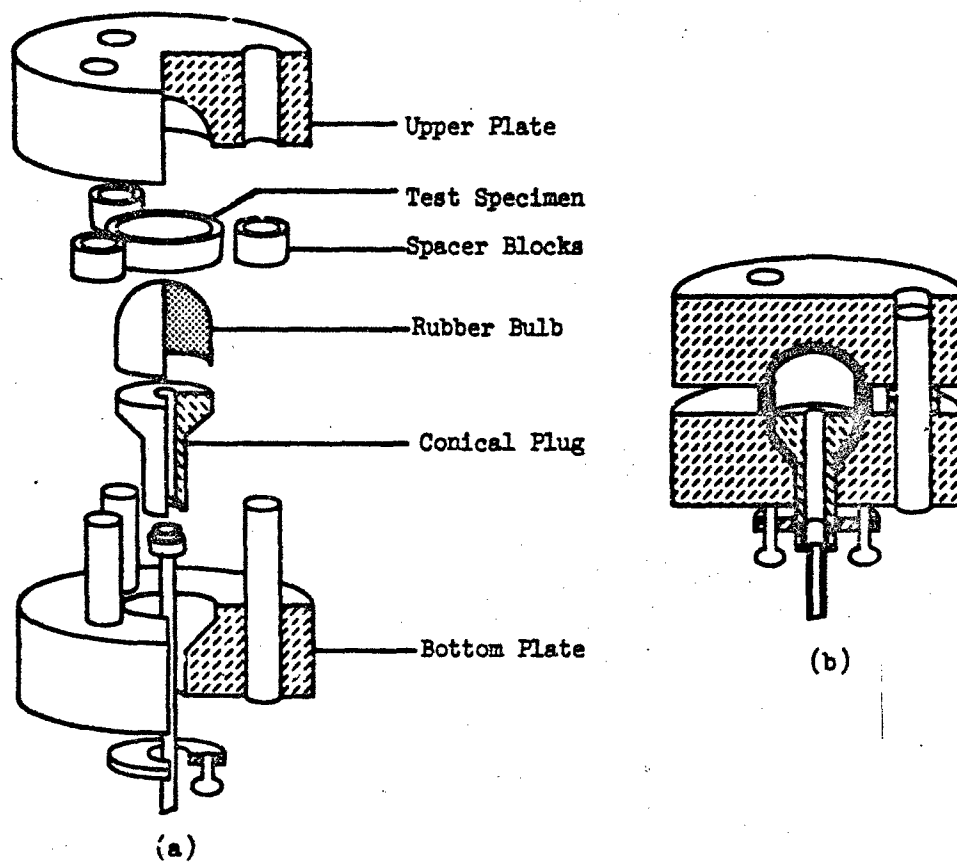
Tensile Test Specimen Holder (a) Exploded View, (b) Assembled Unit
